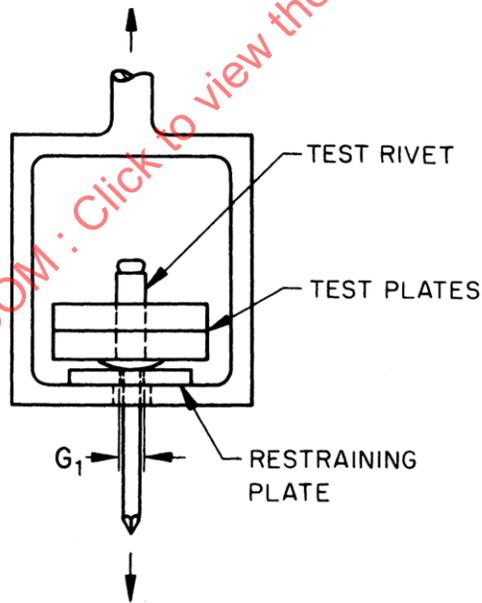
TEST FIXTURE FOR TESTING MANDREL BREAK LOADS AND BLIND HEAD FORMATION
